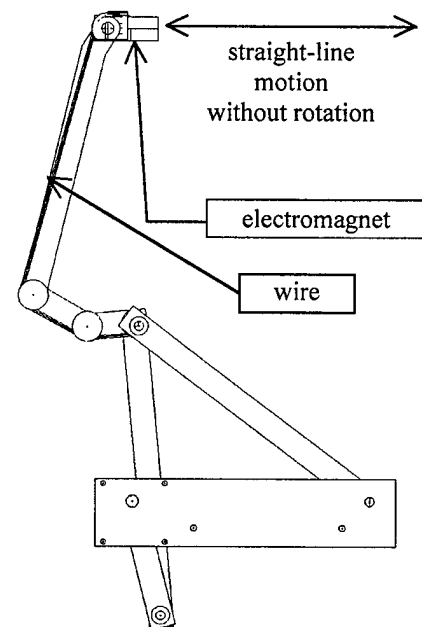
The Chebyshev Type One four-bar linkage with a parallel wire linkage is used to insert and remove the build shelves into and out of the FDM build chamber.
